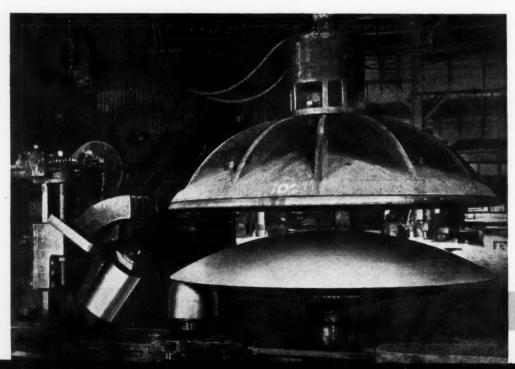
Close-up View Showing Upper Former Mounted on Vertical Hydraulic Ram, Bottom Former Mounted on Spindle Jack, and the Inner and Outer Rollers
